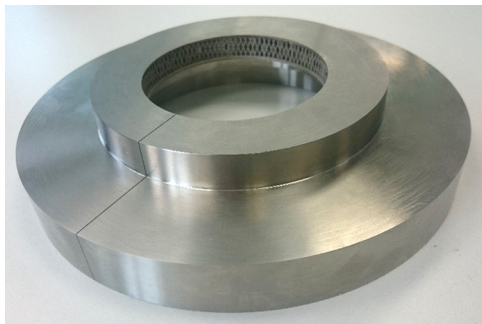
Rotor type A, first version, after turning and notch cutting.
